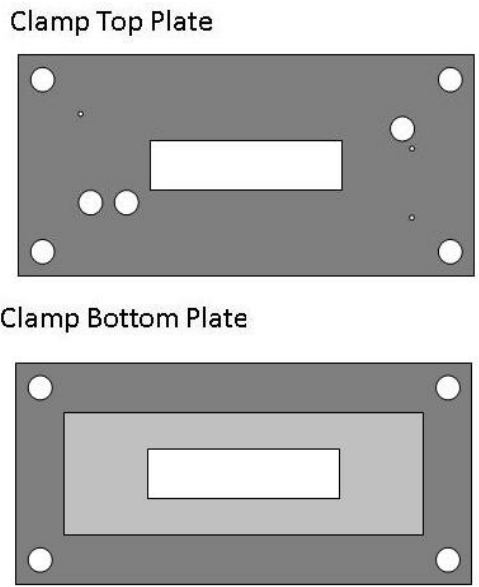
Schematic of aluminum plates used to hold thin layer cell together.
